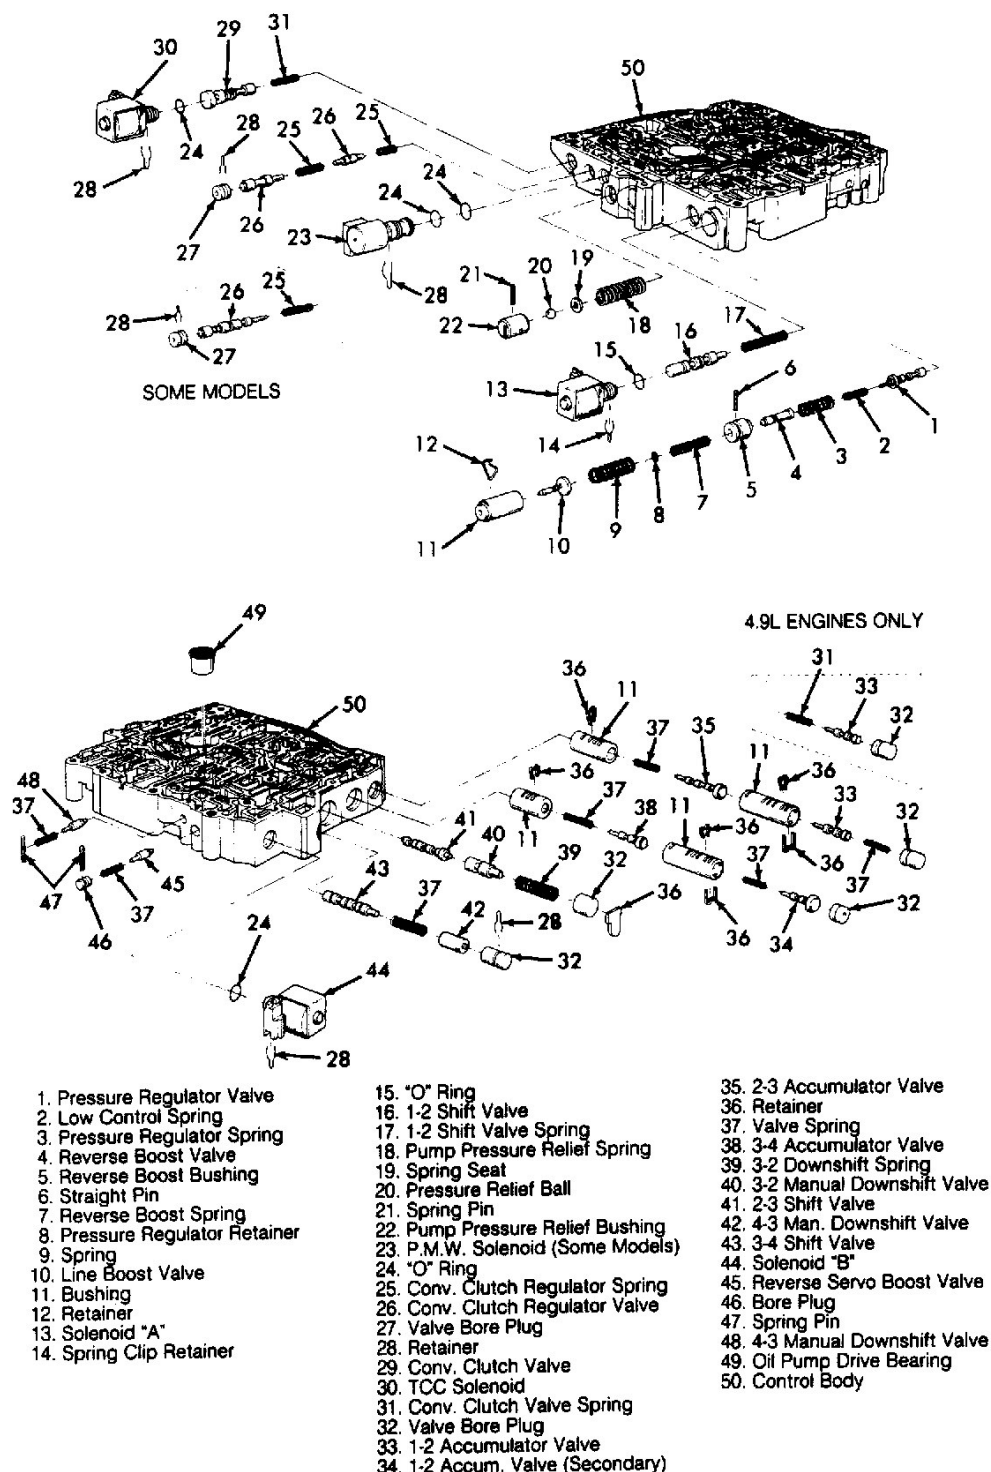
Exploded View of Hydra-Matic 4T60-E Valve Body Assembly
